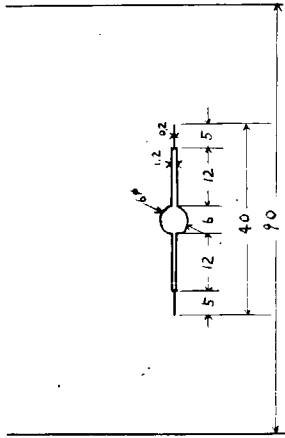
(b) Specimen for Fatigue Crack Propagation
